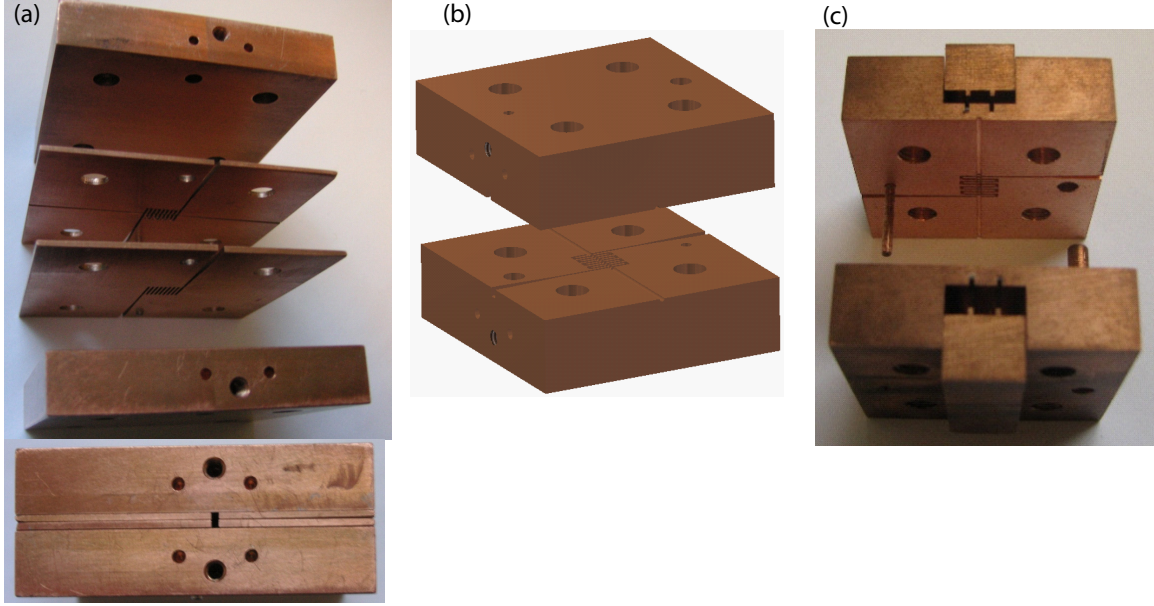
The assembly of the (a) 4-plate design, and (b) A CAD model of the 2-plate design for the 9-cavity cold test structure. (c) The assembly of the 2-plate design with dielectric loading added.
